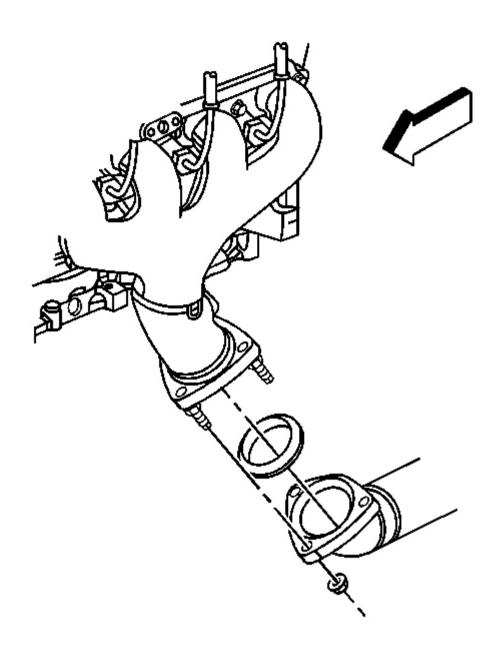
Exhaust Manifold & Nuts Courtesy of GENERAL MOTORS CORP.
